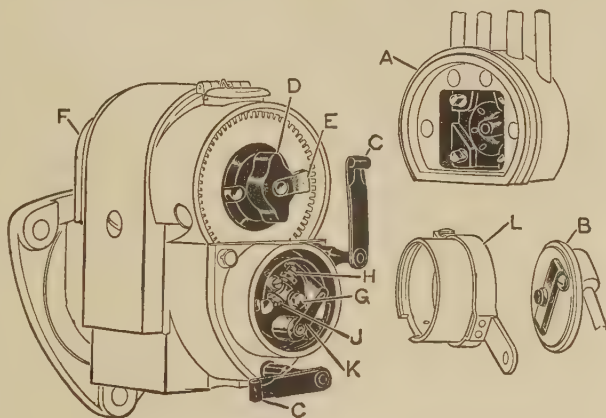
Lucas Car Magneto (Jump-spark type) with Distributor, Contact-breaker Cover, and Cam Ring removed.
